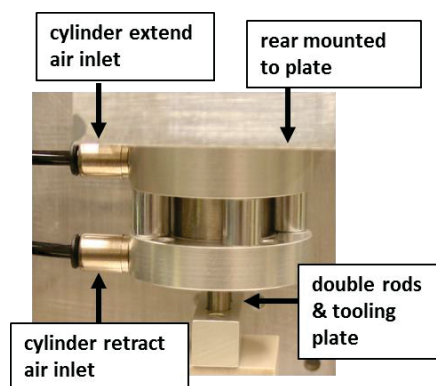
Prototype 2 pneumatic cylinder – 0.75" bore
